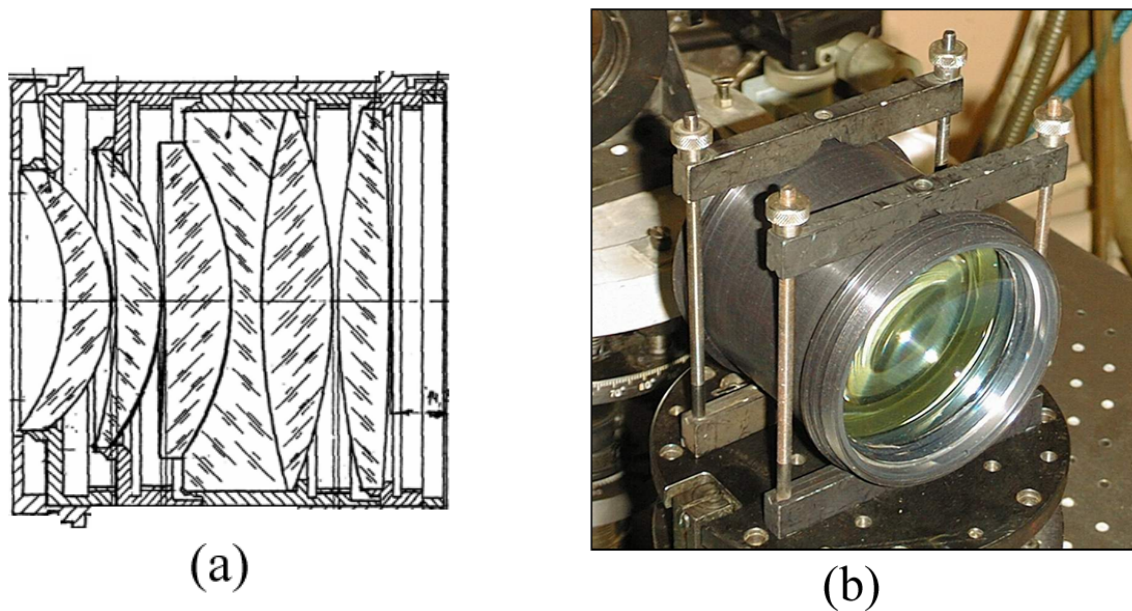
High-resolution microobjective lens: assembly drawing (a) and general view (b).
